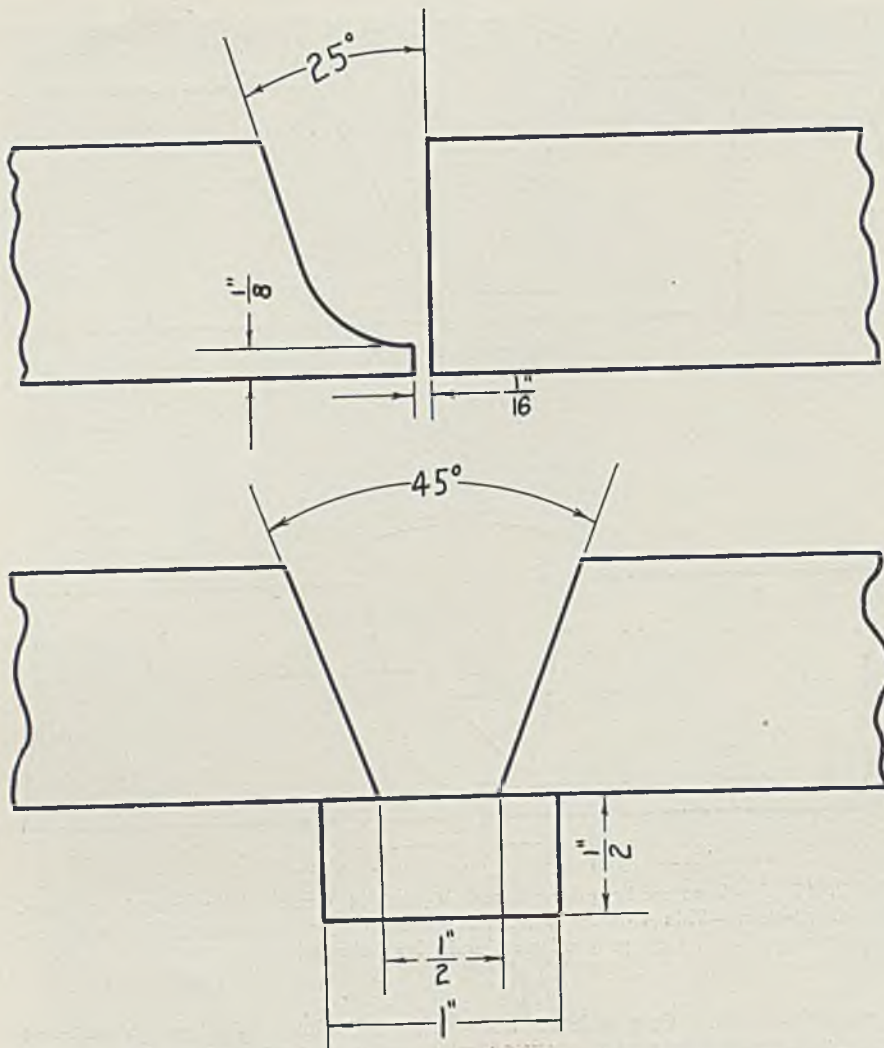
(Above)—The J-joint of this type is well adapted to X-ray welding. Fig. 6. (Below)—Ample heat capacity in the backing strip and proper root spacing eliminate costly cut-outs
